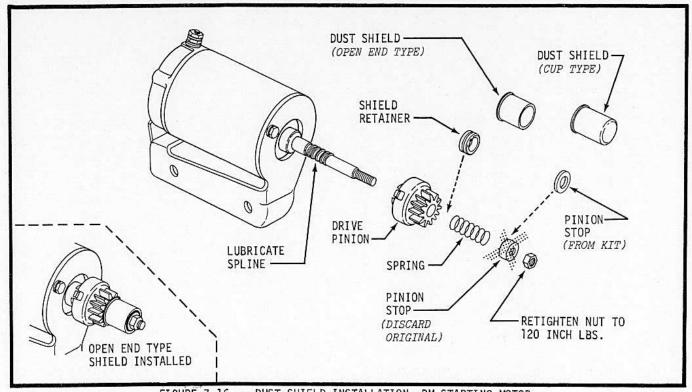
DUST SHIELD INSTALLATION--PM STARTING MOTOR
